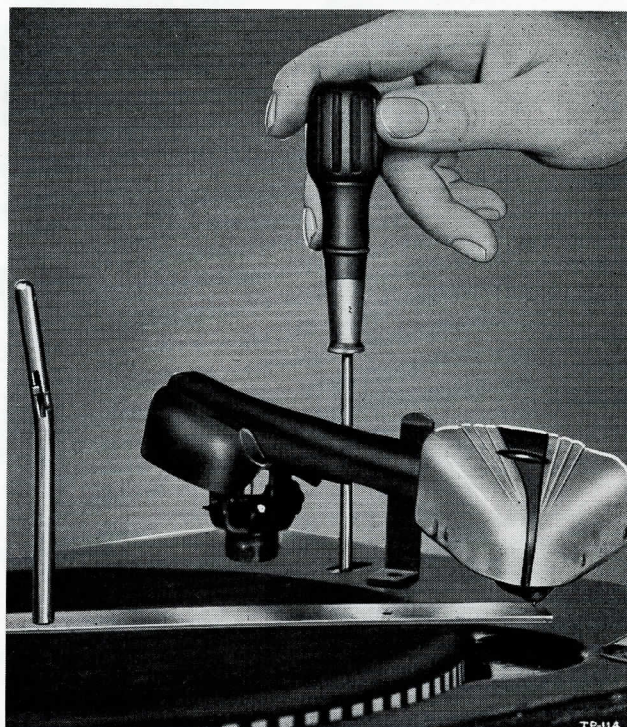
INDEXING ADJUSTMENT—USING MARKED SHELF GAUGE
